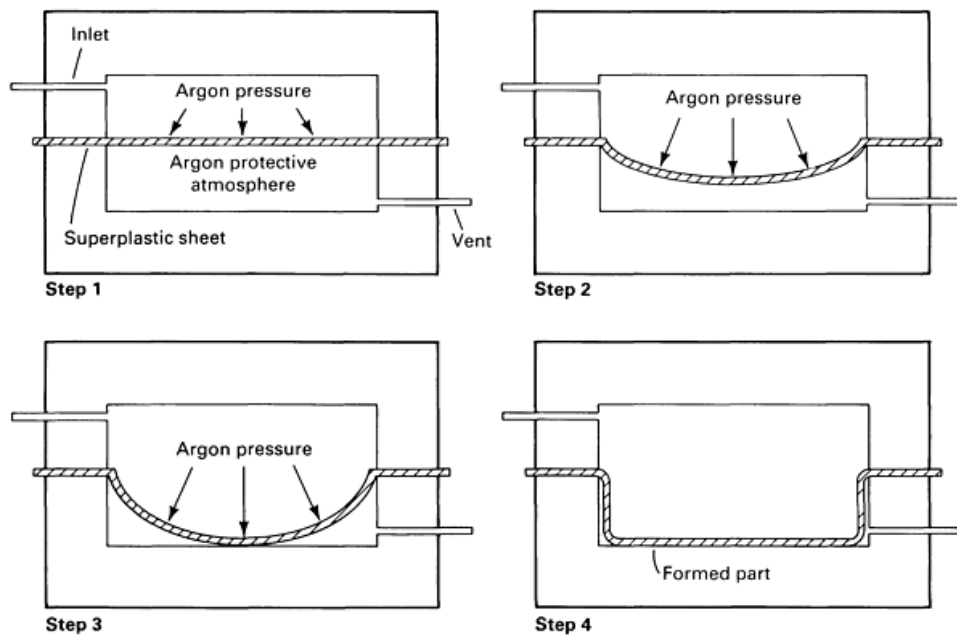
Illustration of the blow-forming method of superplastic forming.
